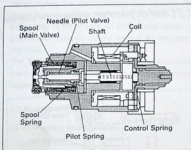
Actual Cross-section of Solenoid Spill Valve
